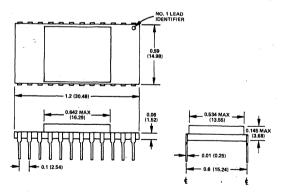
Outline Dimensions (Dimensions shown in inches and (mm))
